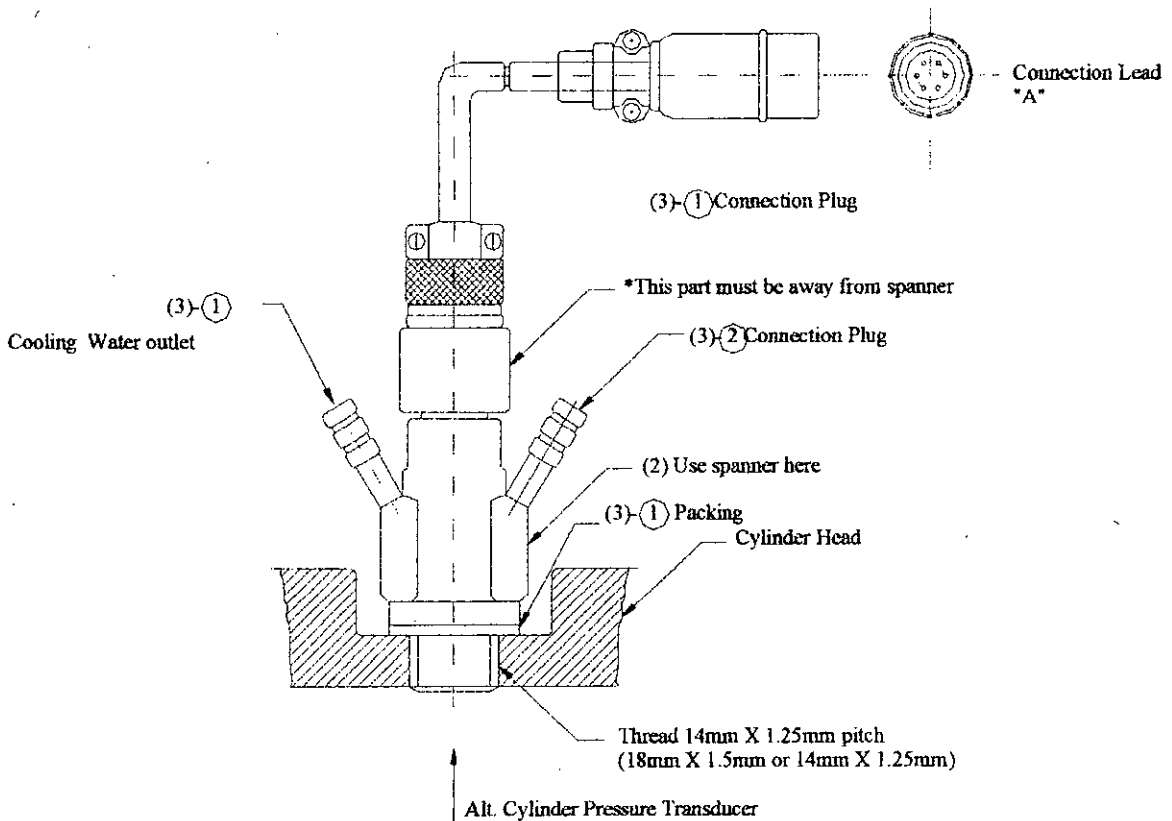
Pressure transducer assembly for measuring in-cylinder pressure.
